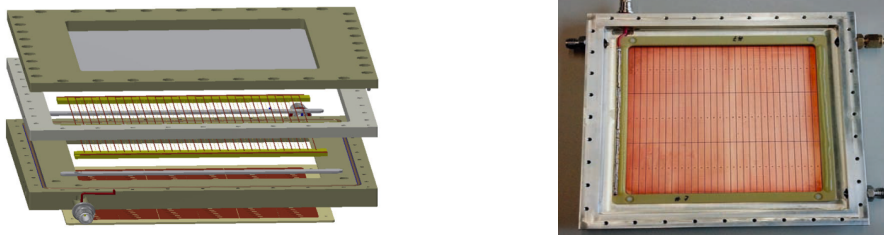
A layout of the small TRD prototype from bottom to top consisting of pad plane, aluminum frame, alternating wire plane, a frame and the entrance window foil with its support (left). Rear view of the small aluminum-frame prototype (right) [15].
